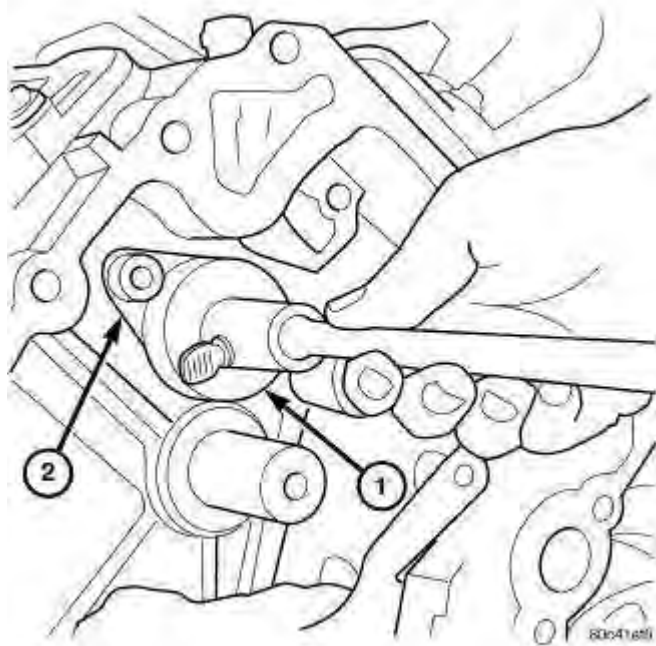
Counterbalance Shaft Removal/Installation Tool
